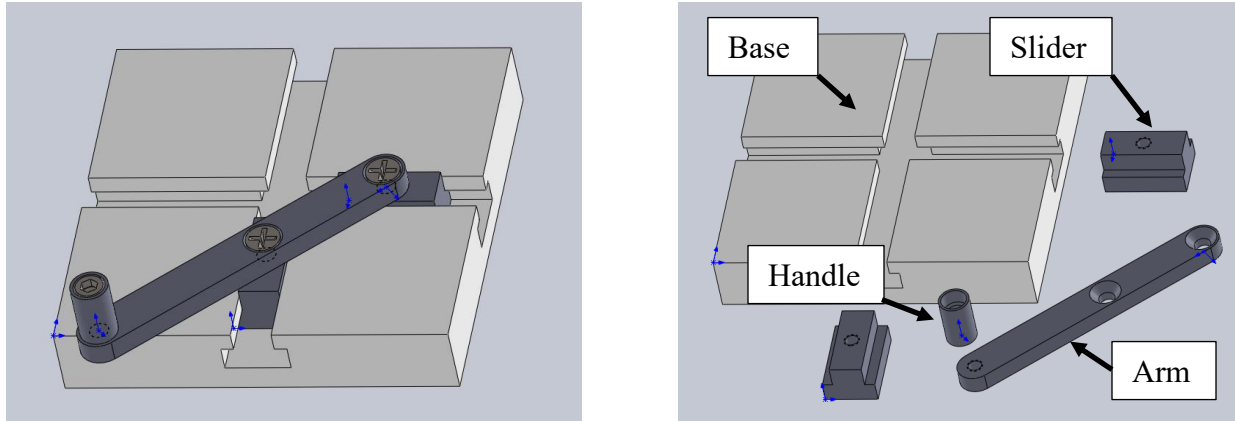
Slider Project Created Using Manual and CNC Milling Machine¹
